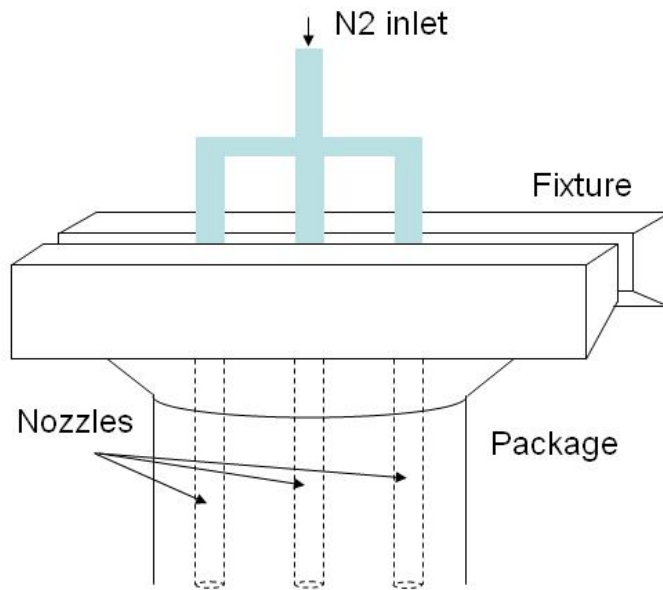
Package fixed in the sealing rig while evacuating oxygen.
